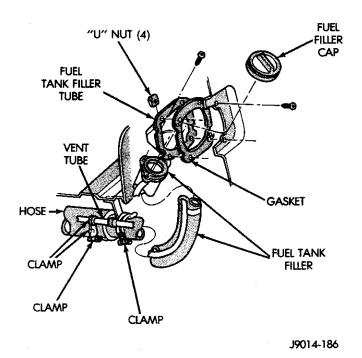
Fuel Filler Tube and Vent Tube to Filler Neck
